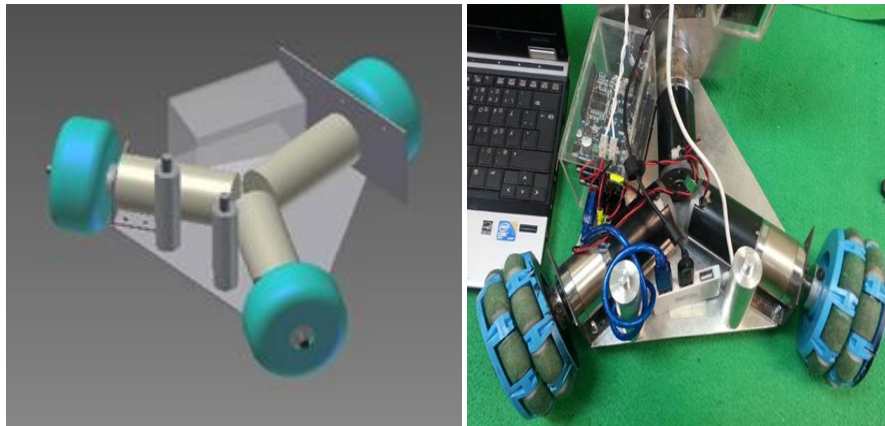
Three-Wheel drive mechanical construction (design and physical)
